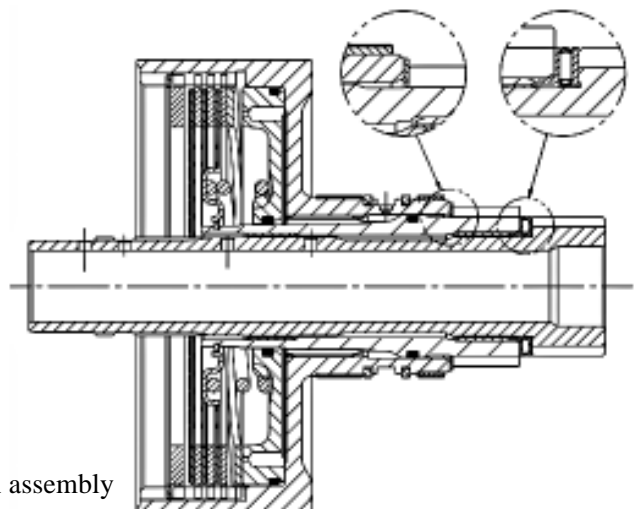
Forward-Gear central gear and C3 clutch assembly
